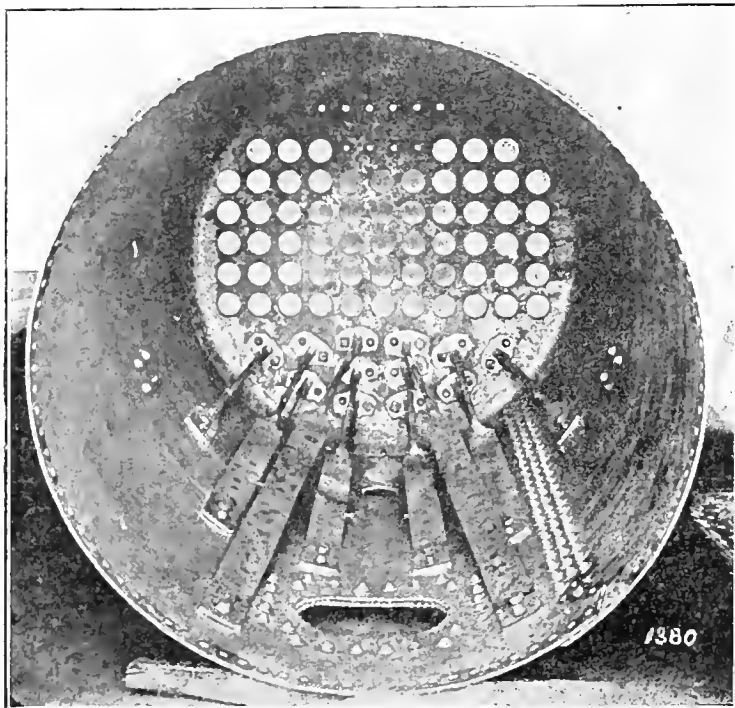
BOILER HEAD BRACED WITH DIAGONAL BRACES.
